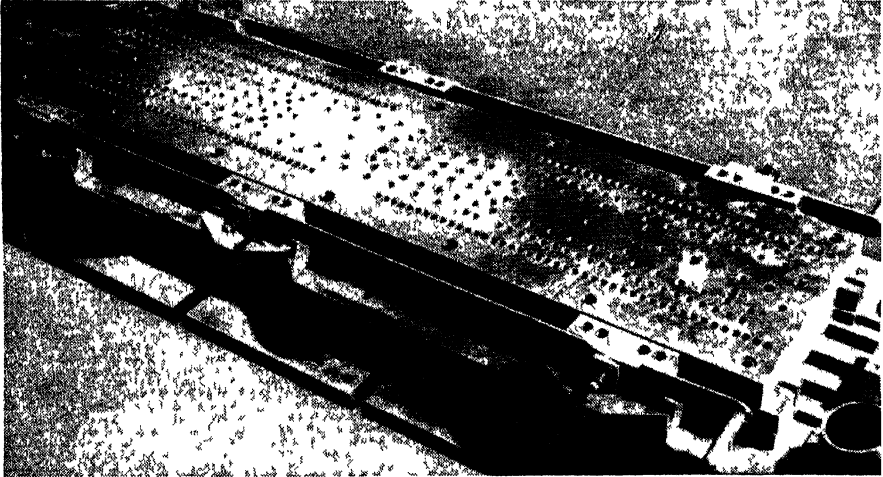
One of the stripper plates used in "Porcupine" die for piercing five different sets of parts used in Flying Fortress construction
